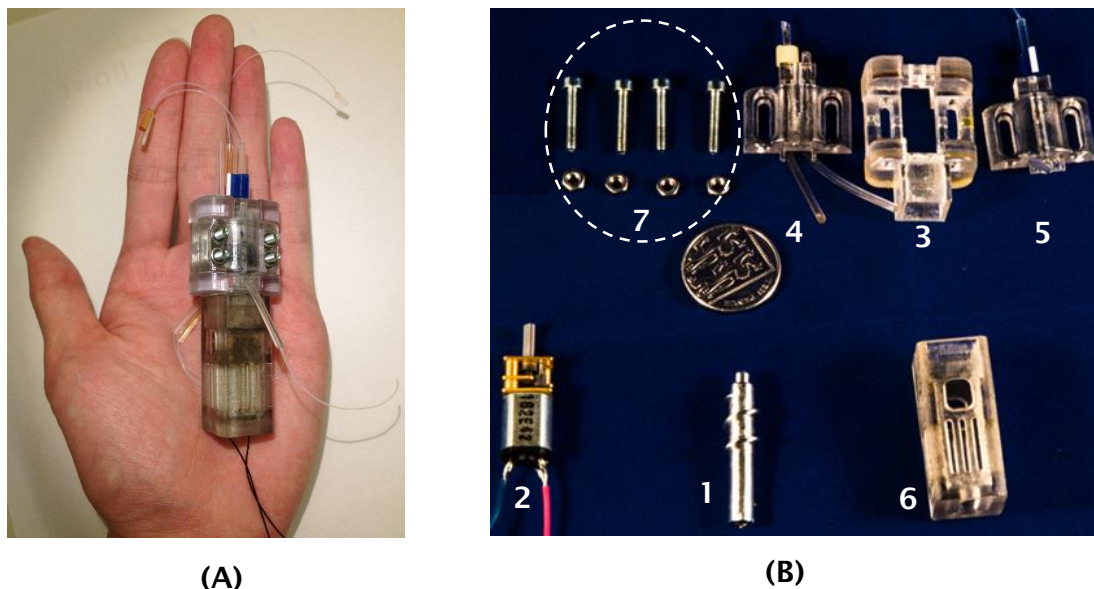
Fabrication of the pump. (A) Assembly of the pump
